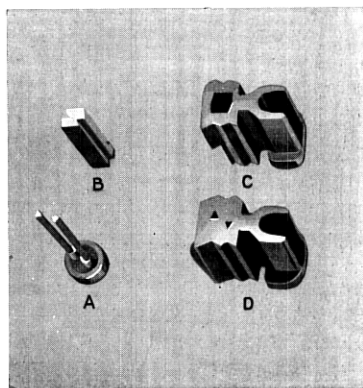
Shedder, insert, and perforator punch for solderless cord tip punch and die
